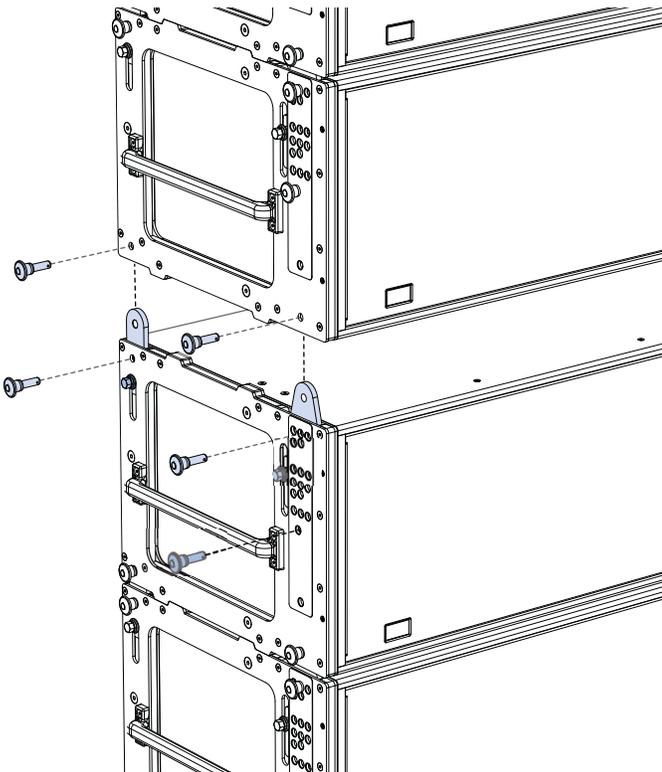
LEO-M GuideALinks with Quick-Release Pins, Exploded View
